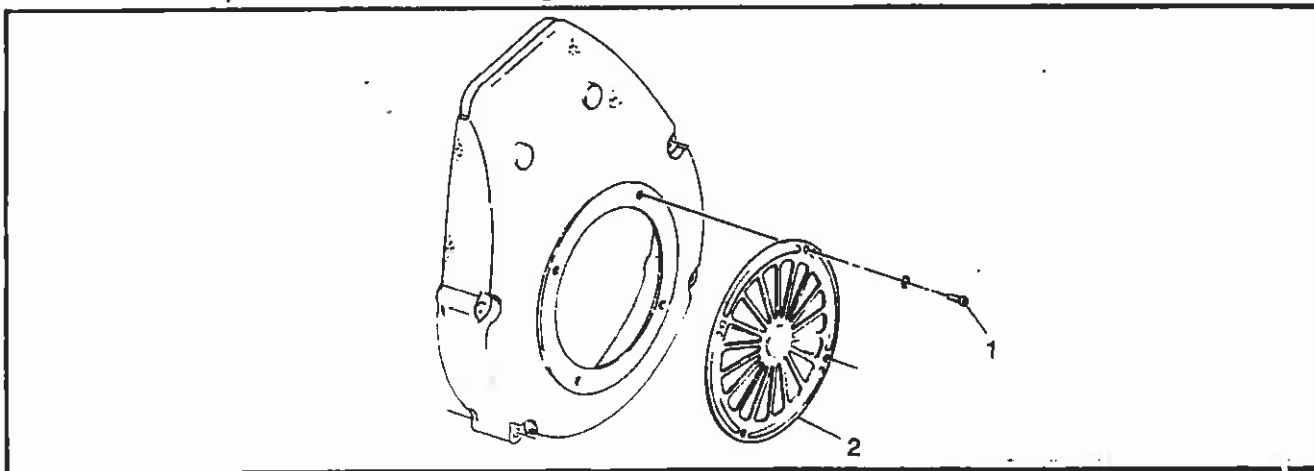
REMOVING THE STANDARD FACEPLATE
